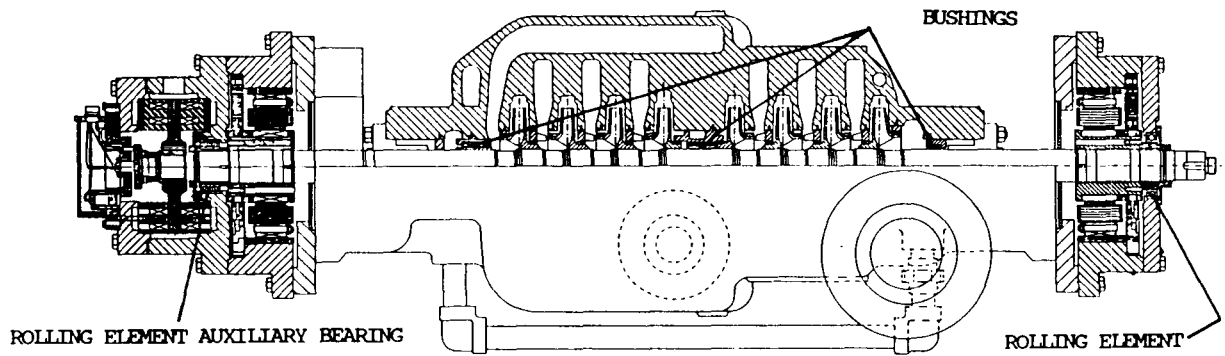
MULTISTAGE VOLUTE PUMP FITTED WITH MAGNETIC BEARINGS. I-R PUMP MODEL 4X10DA-8 WITH RADIAL BEARING ON DRIVE END AND RADIAL AND AXIAL BEARINGS ON NONDRIVE END.
